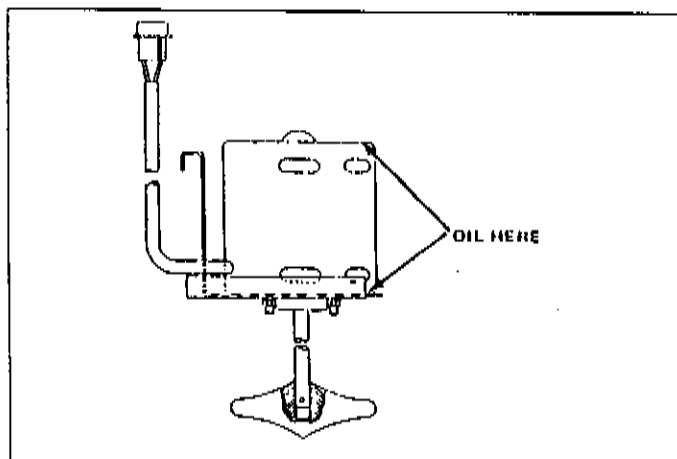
1 AGITATOR MOTOR LUBRICATION
